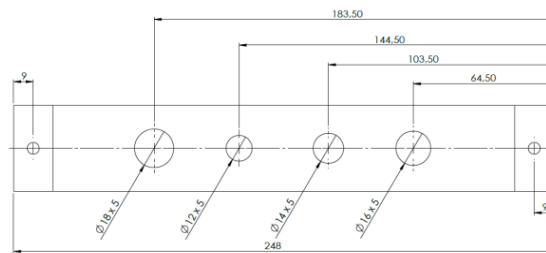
Drawing scheme of the hole configuration for all 1<sup>st</sup> category inspection blocks (bottom view); the holes near de edges were made to screw the bars on the heating box.
